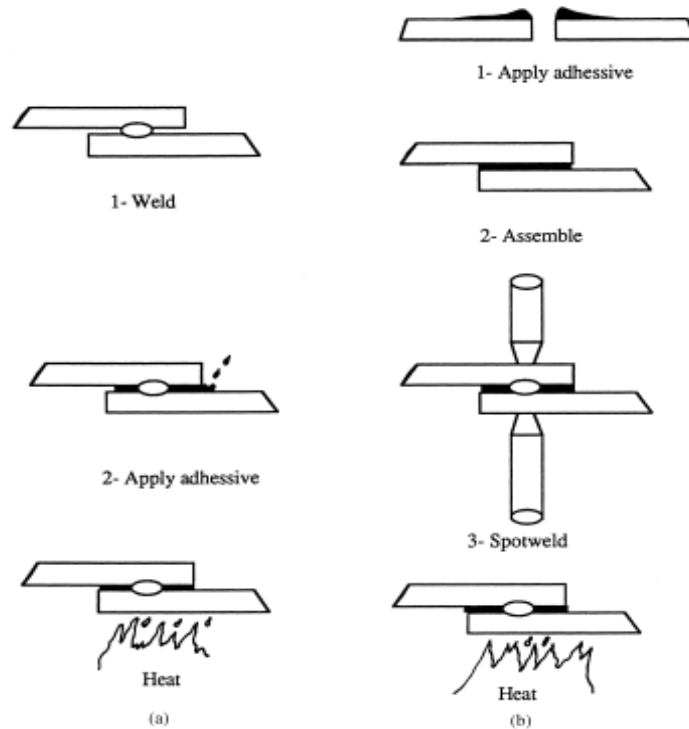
Weld-bonding techniques: (a) Flow-in and (b) Weld-through, from [60].
